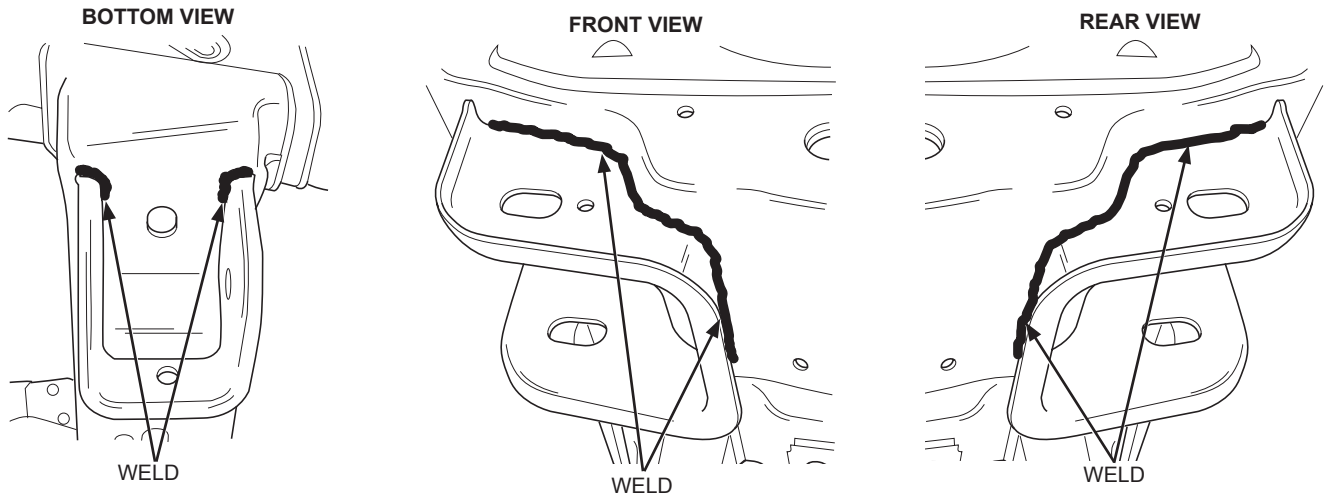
LOWER CONTROL ARM BRACKET SHOWING FINAL WELD PATTERN, RH SHOWN, LH SYMMETRICALLY OPPOSITE
